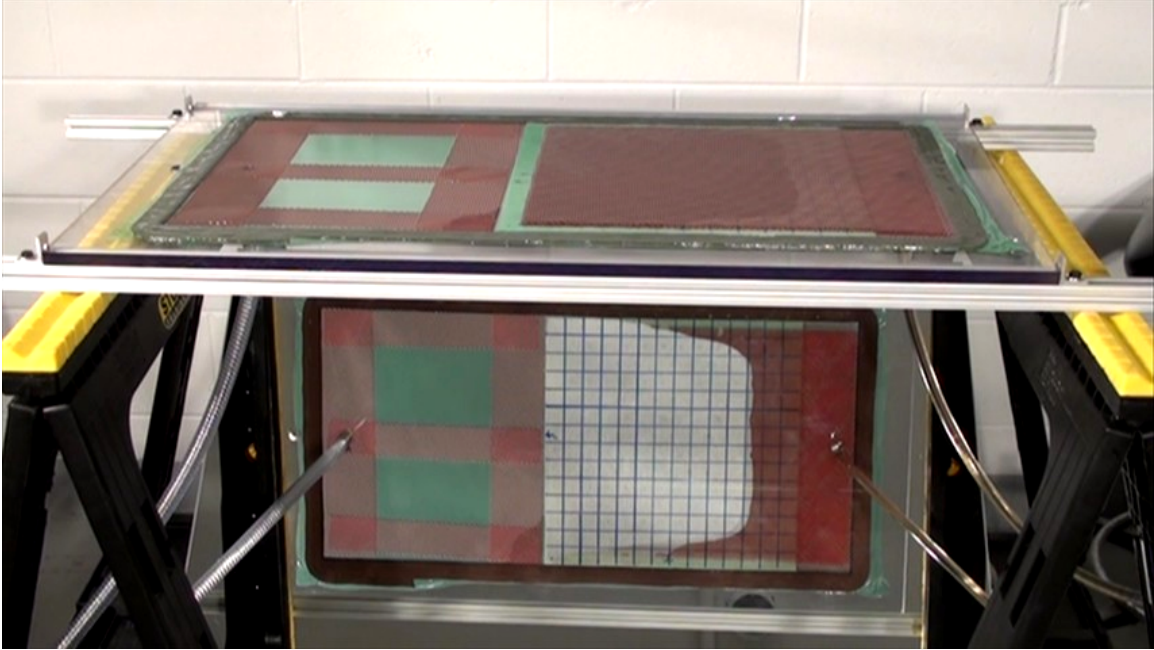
Photograph of the flow visualization fixture. Fluid flow fronts can be observed on the top and bottom surfaces of the preform.
